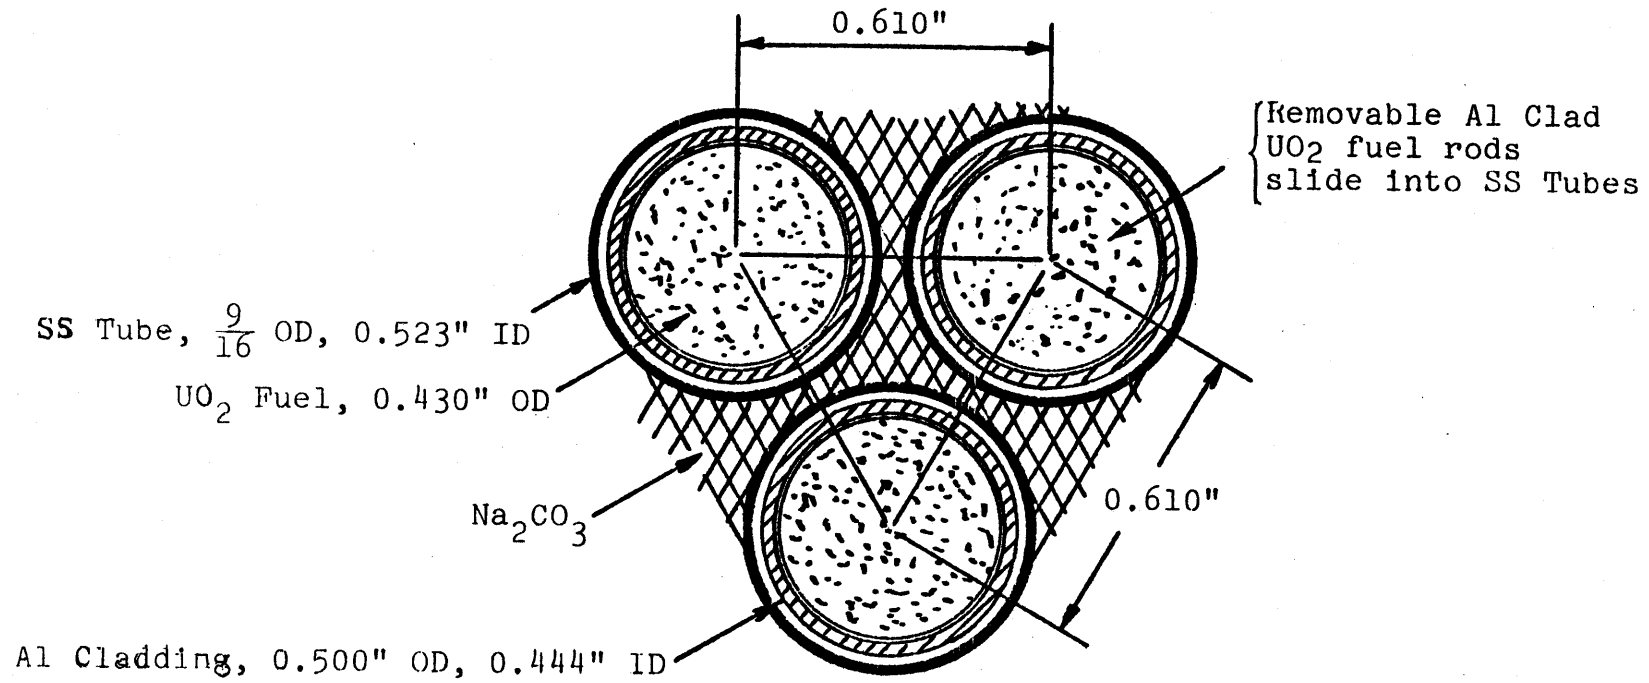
Unit Cell of Special Interface-Traversing Subassembly
